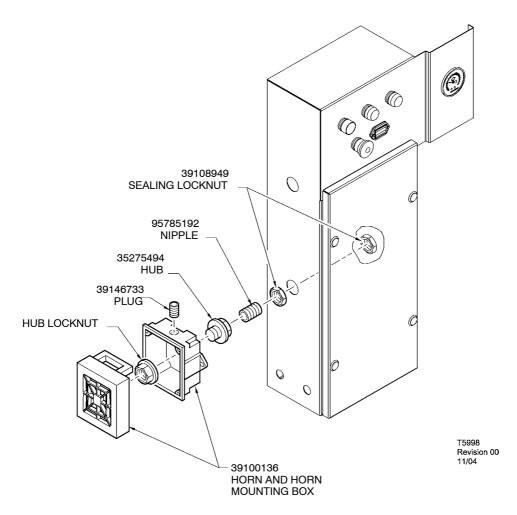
STARTER ENCLOSURE WITH HORN ASSEMBLY
